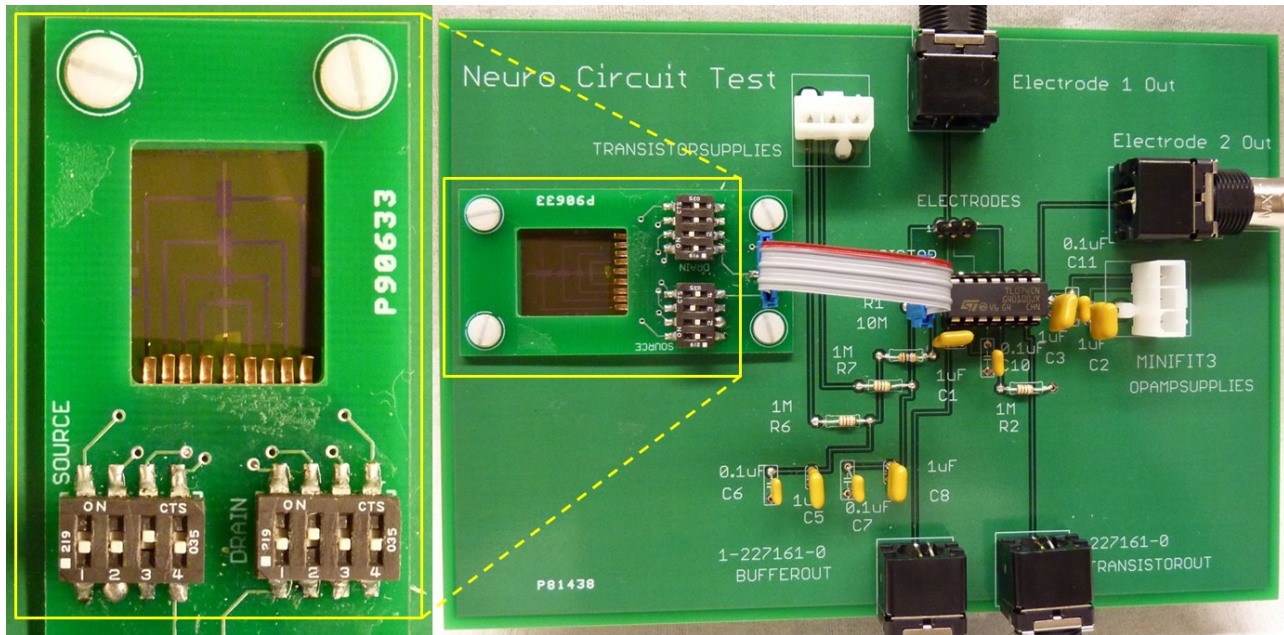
The dual PCB board design. The large board contains all elements of the circuit excluding the transistor: the amplifying resistor, lowpass power supply filters, output buffer and highpass filter, and input/output components. The ribbon cable attaches the transistor to the rest of the circuit. The enlarged image on the left clearly shows the copper fingers used to make pressure contact with the organic TFT underneath.
